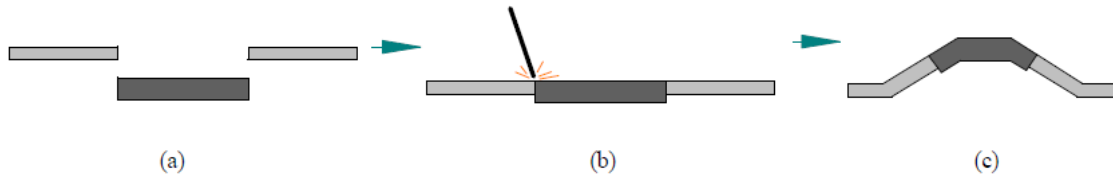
Principle of tailor welded blanks (a) Blanks, (b) Joined by a welding process and, (c) Forming.
